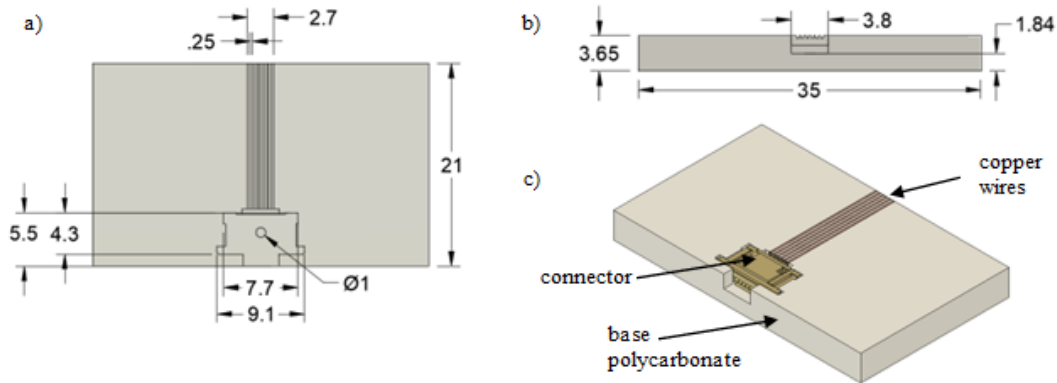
CAD designs (all dimensions in mm). a) Top view of the machined specimen. b) Front view. c) Isometric view of coupon with copper wires and Molex connector.
